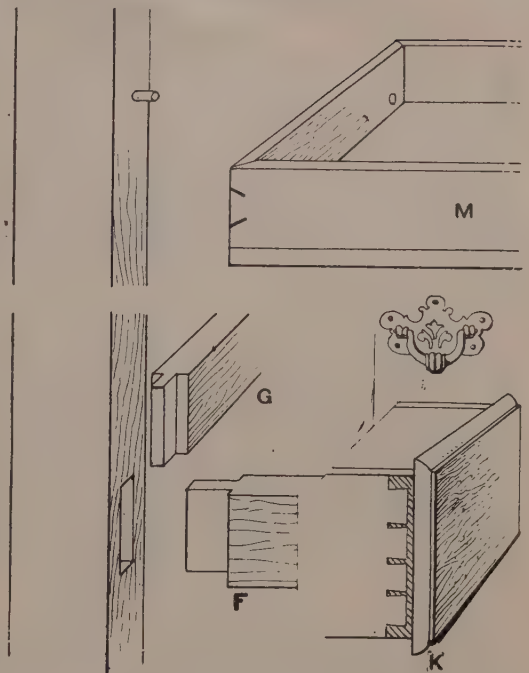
DETAIL OF DRAWER AND FALL TRAY.
